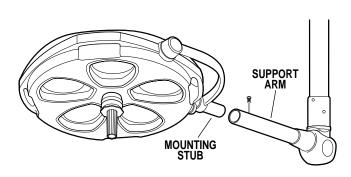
Model 23 or 19 Lighthead Installation (ST23 Lighthead shown)
